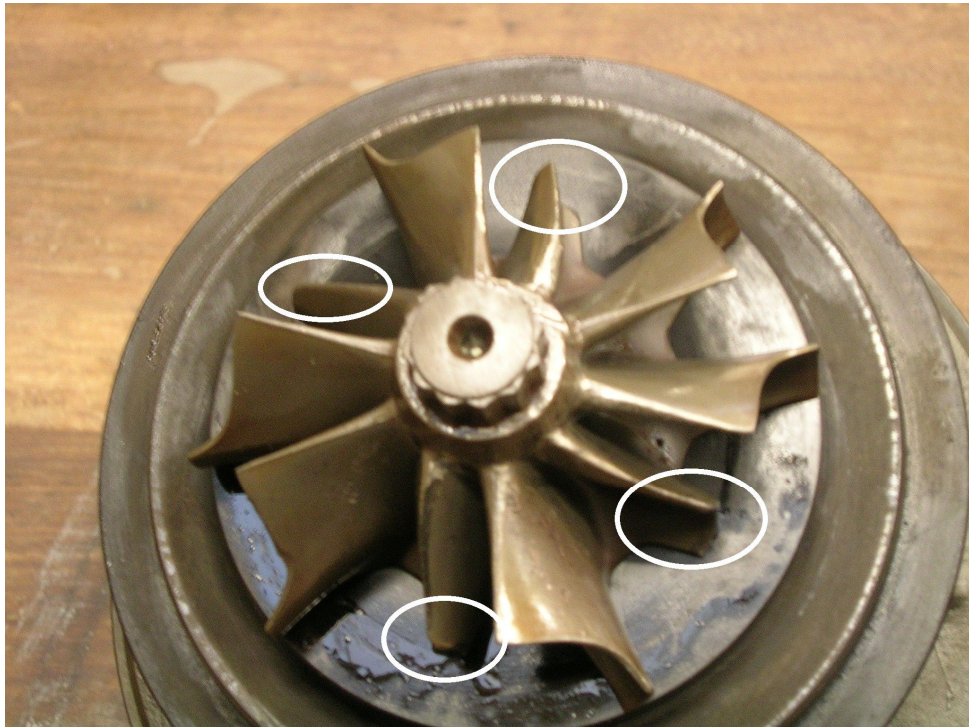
Free power turbine impeller with four damaged blades.
